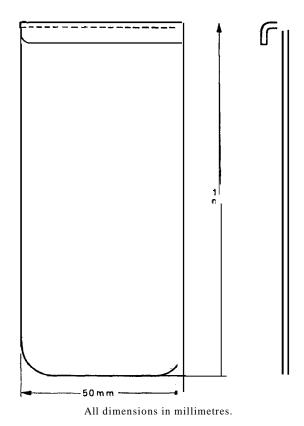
REMOVABLE SHUTTER FOR THE DRAUGHT SCREEN
